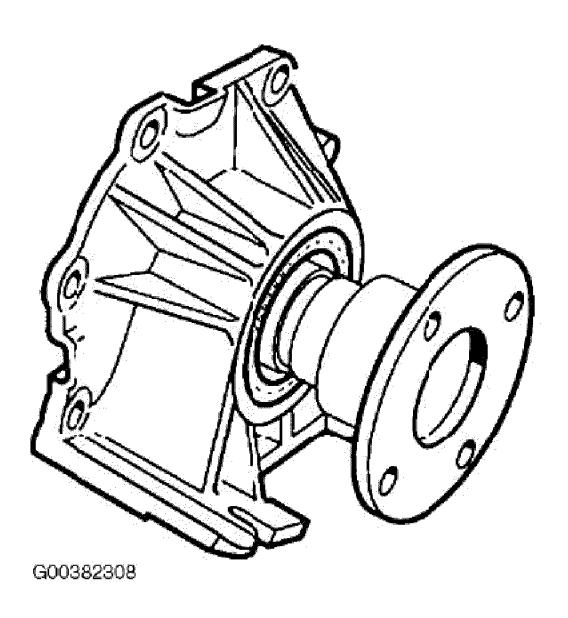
Removing Output Flange From Mounting Courtesy of BMW OF NORTH AMERICA, INC.
